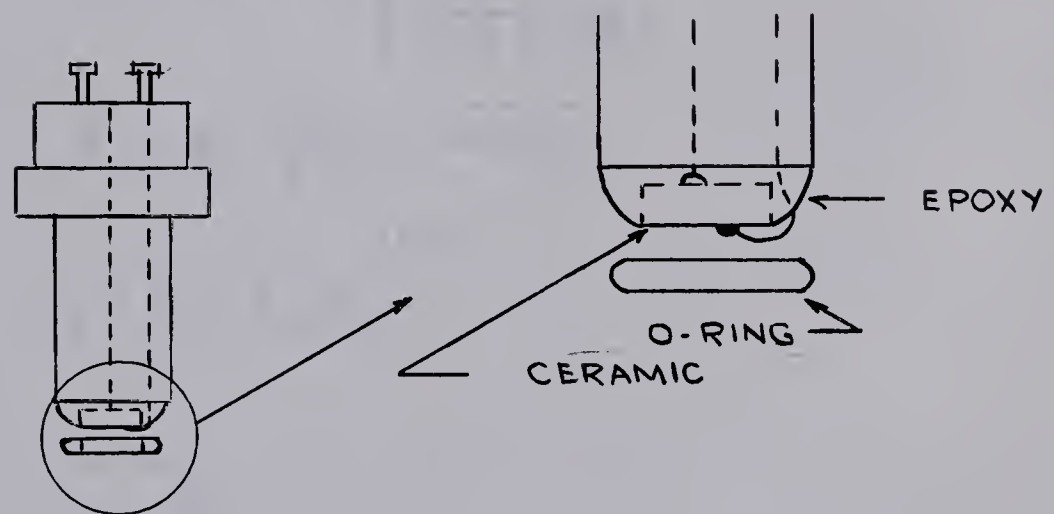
PIEZOELECTRIC CERAMIC ASSEMBLY
